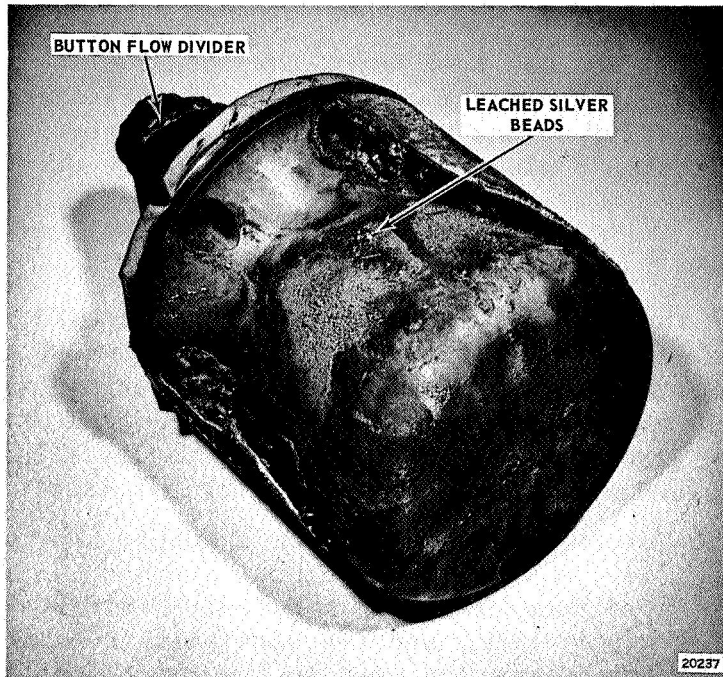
5500°F Vortex Power Valve Button Assembly After Test
